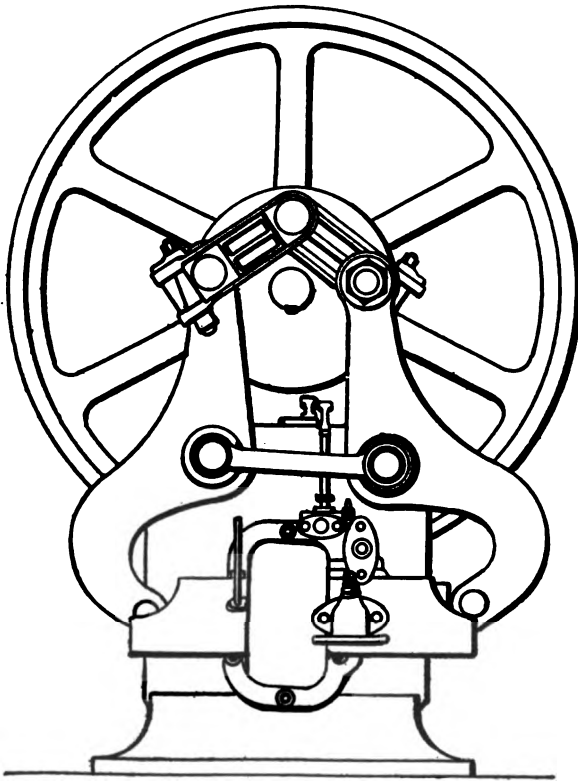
ATKINSON DIFFERENTIAL ENGINE.
